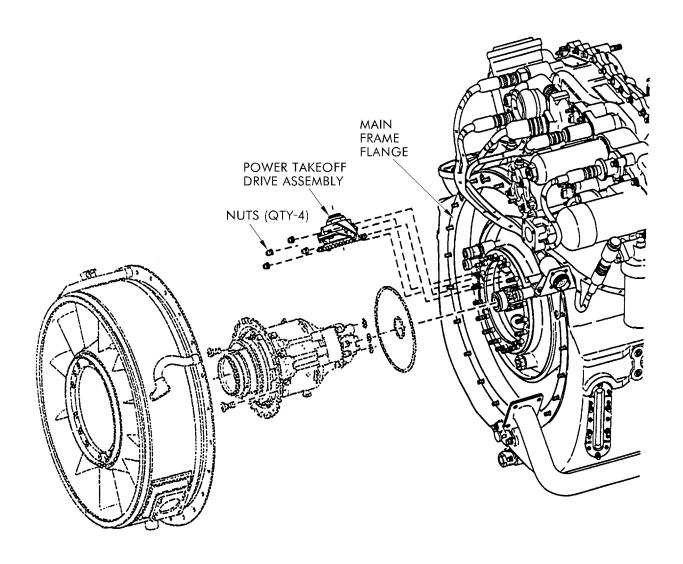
Power Takeoff Drive Assembly; Removal and Installation
